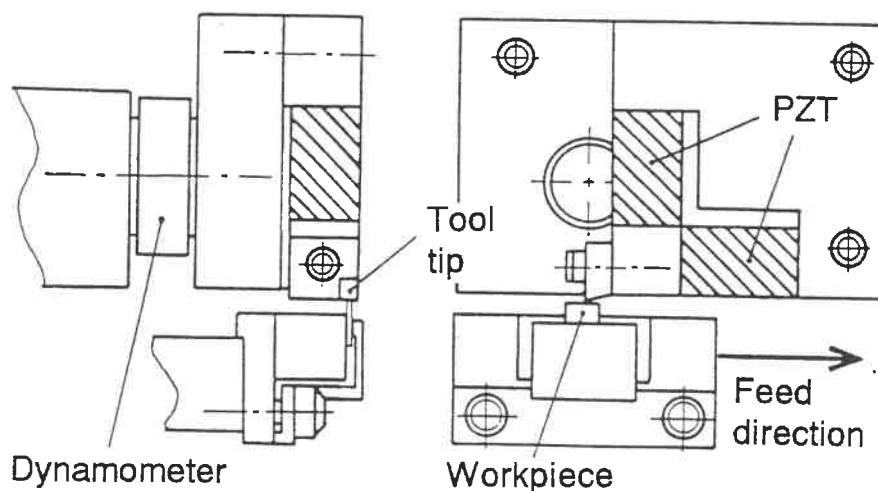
Orthogonal cutting machine equipped with elliptically vibrated tool.
